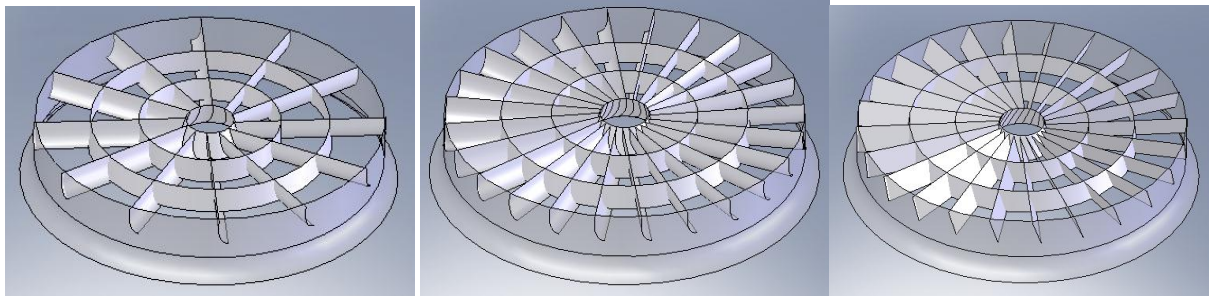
Modifications of the directing vanes: a) honeycomb with 12 profiled blades; b) honeycomb with 24 profiled blades; c) honeycomb with 24 rectangular blades without the twist.
